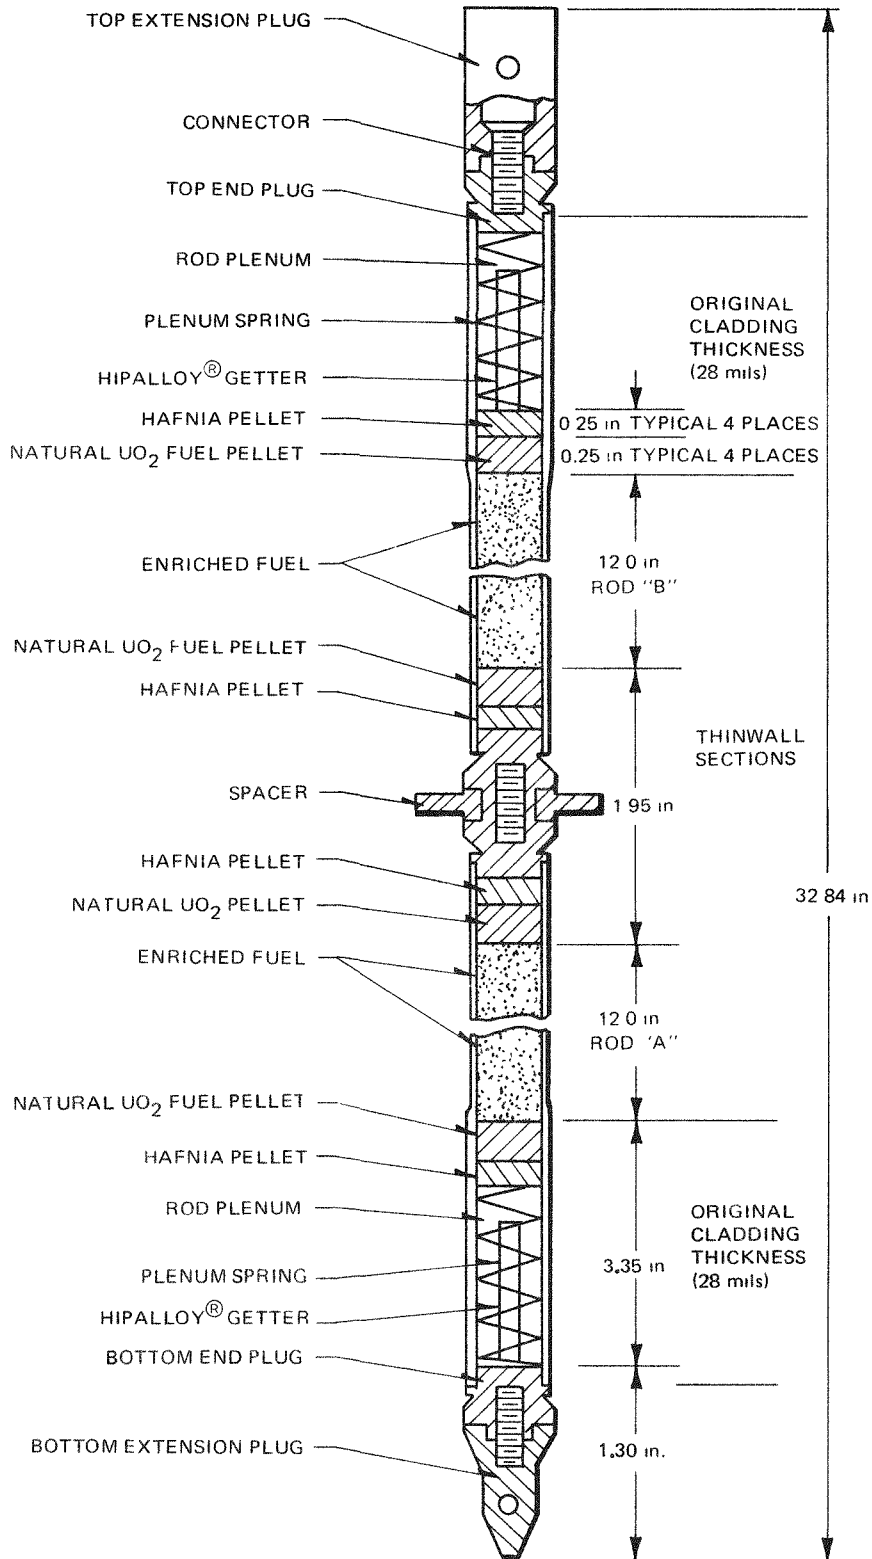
Sketch of Collapsed Cladding Fuel Rod Assembly
